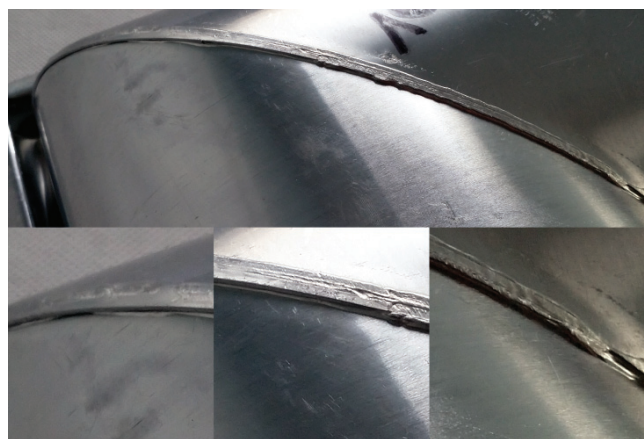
Sample test weld with enlargement of selected areas
